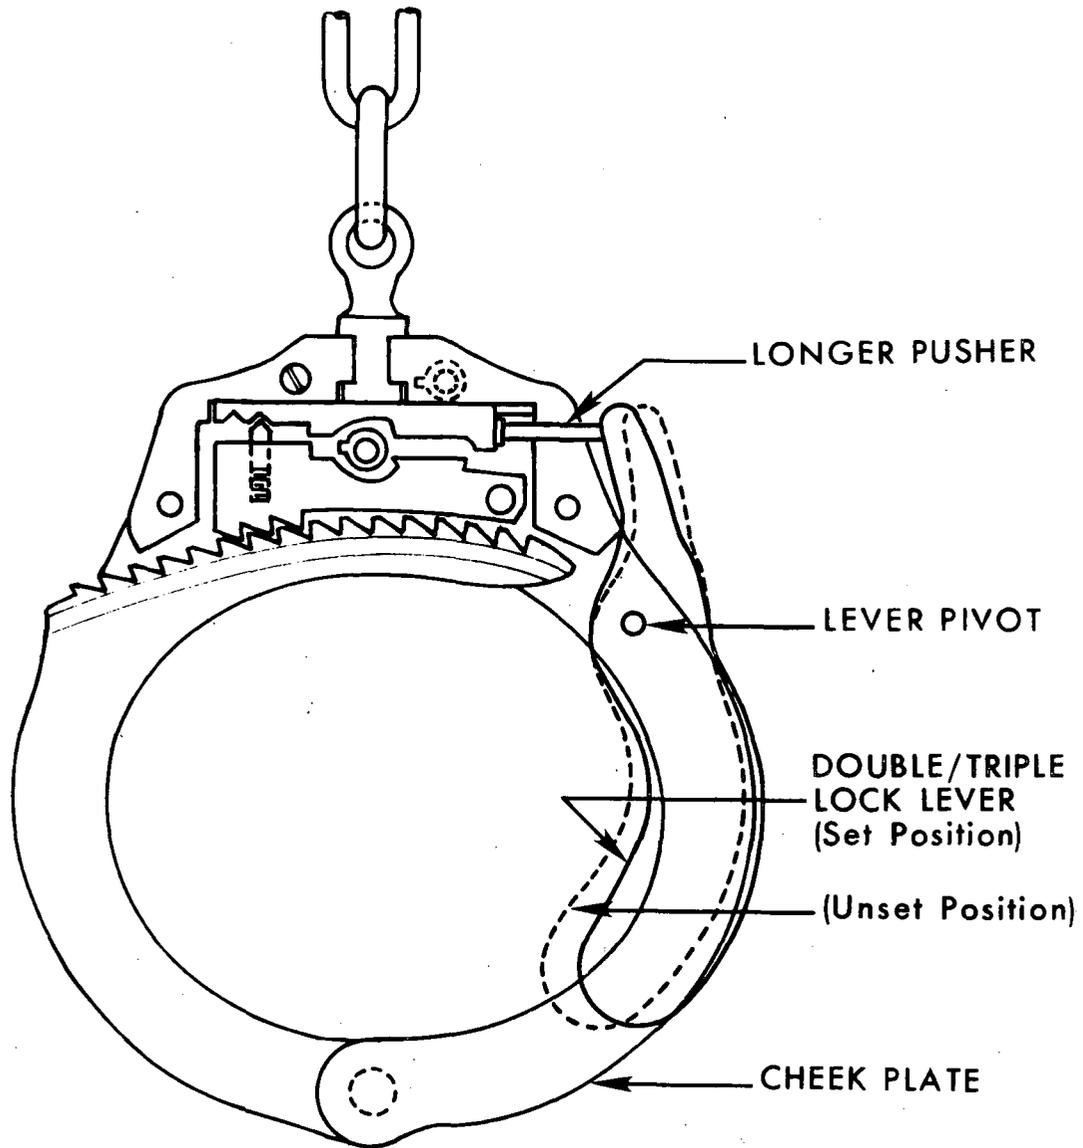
Partial cross section of improved handcuff with the double lock bolt inactive.
